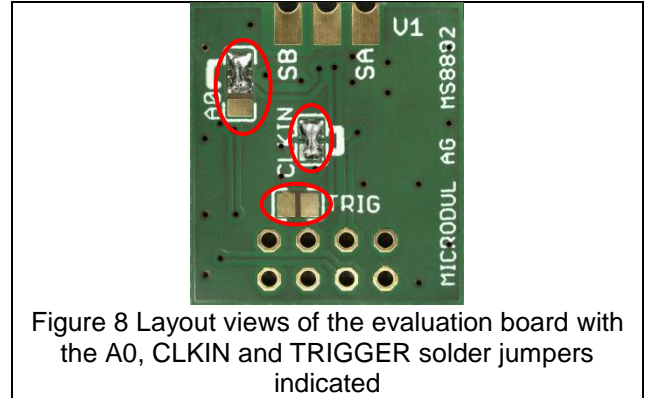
Layout views of the evaluation board with the A0, CLKIN and TRIGGER solder jumpers indicated
